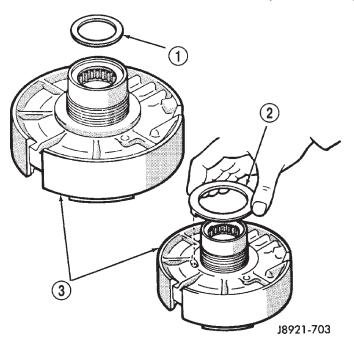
Installing Overdrive Support Thrust Race And Washer
